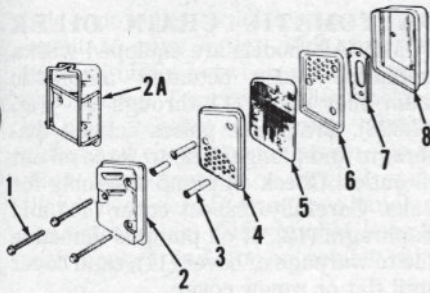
Exploded view of muffer. Cap (2A) is used on Model 330W.
